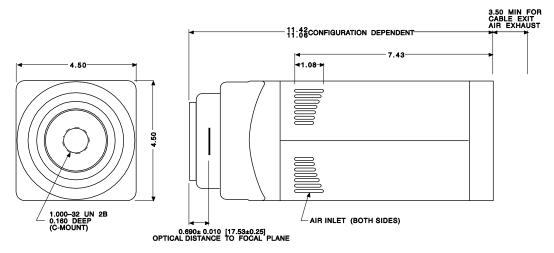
Outline Drawing: PI-MAX/PI-MAX2 with C-mount Adapter
